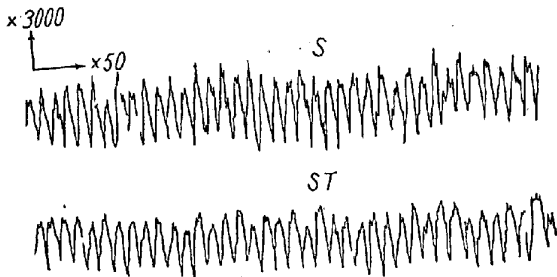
Machined surface curves in cold drawn 18-8 stainless steels.
